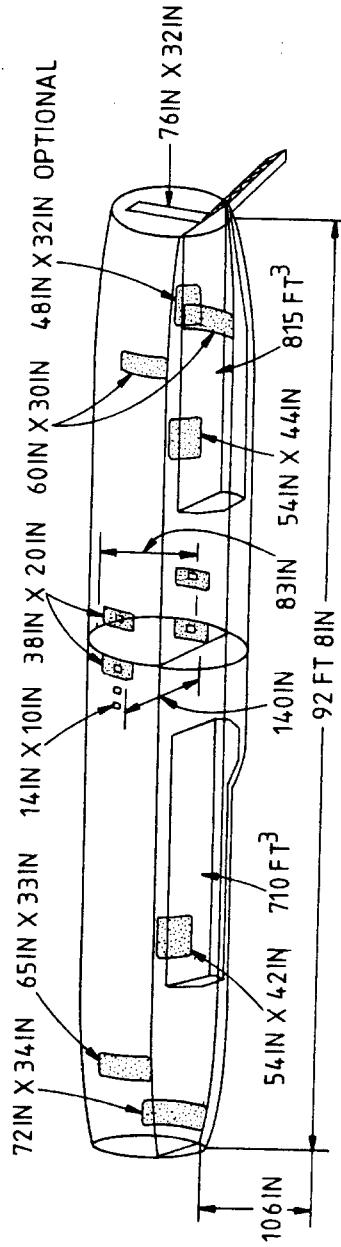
Fuselage and Cargo Hold Dimensions for Jet Transports
